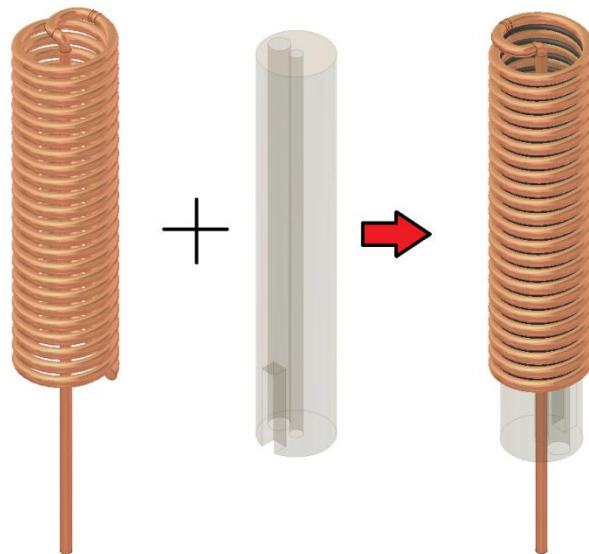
Polycarbonate core installation in helical winding during 112 mm solenoid manufacture
